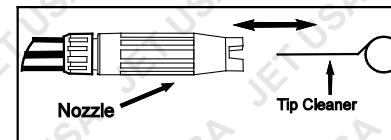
Insert tip cleaner in nozzle hole and move back and forth until debris is dislodged
